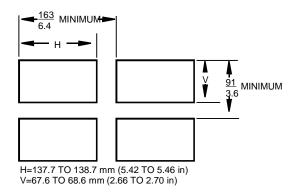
Panel-Mounted Enclosure — Cutout Dimensions
